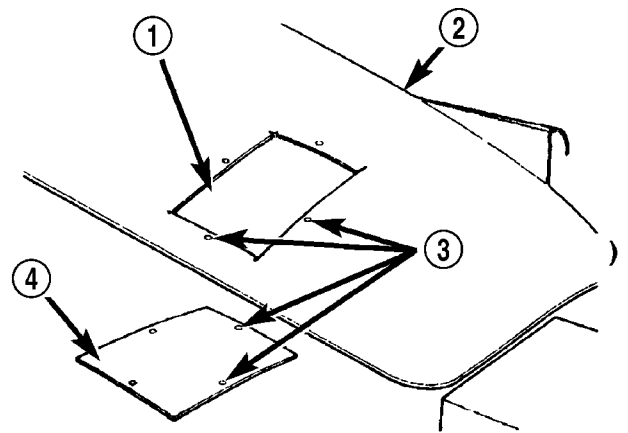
DAMAGED PANEL CUTOUT AND PATCH
